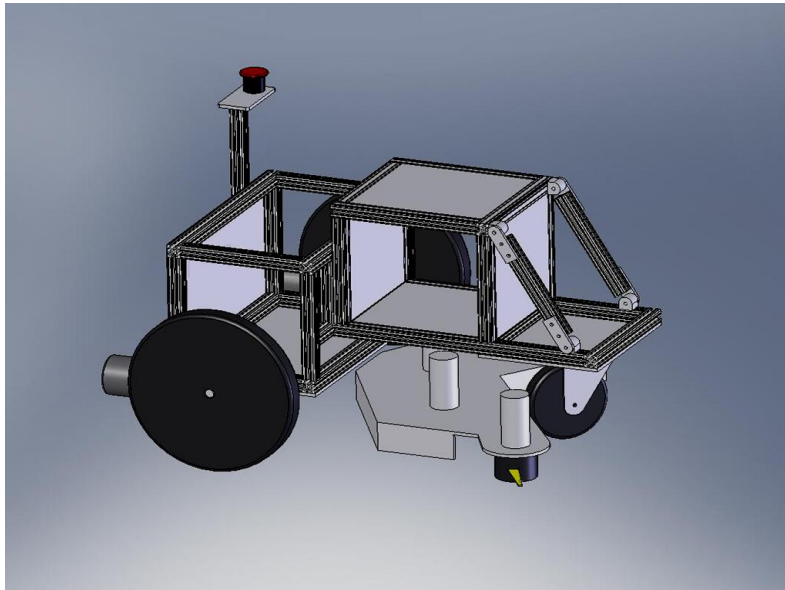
Solid Works Drawing of the Lawnmower Mechanical Design [8].
